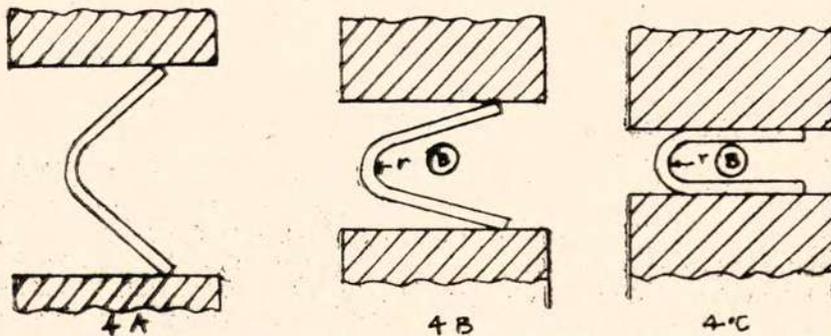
FREE BEND TEST THROUGH A SPECIFIED ANGLE
